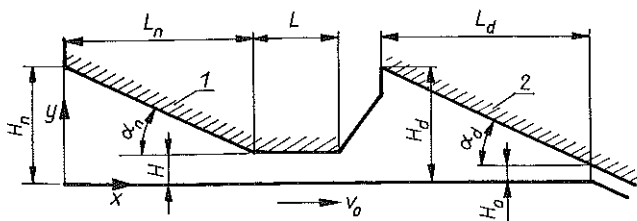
Calculation scheme for the compound drawing device design parameters:
